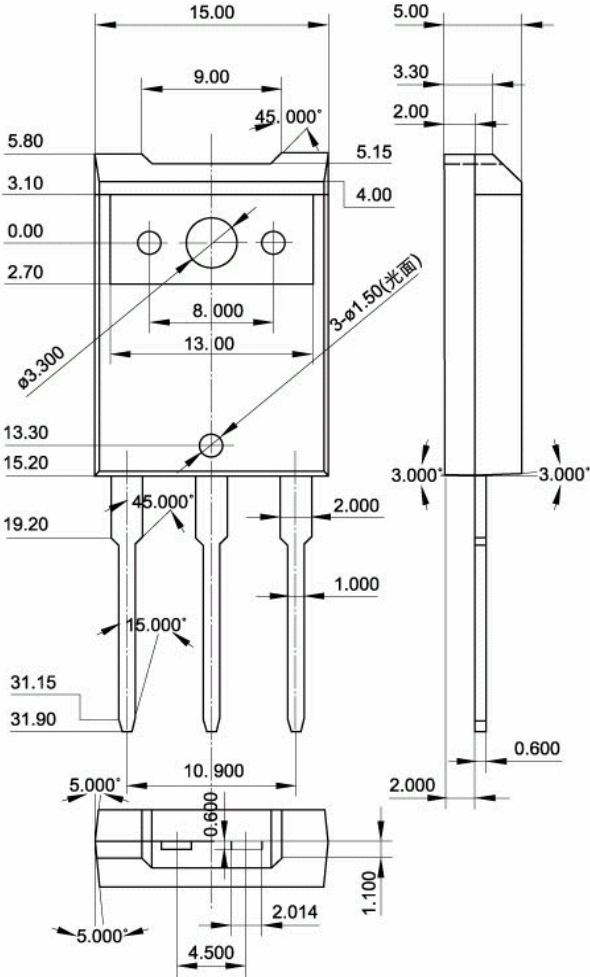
Outline dimensions (unindicated tolerance: ±0.30mm)
